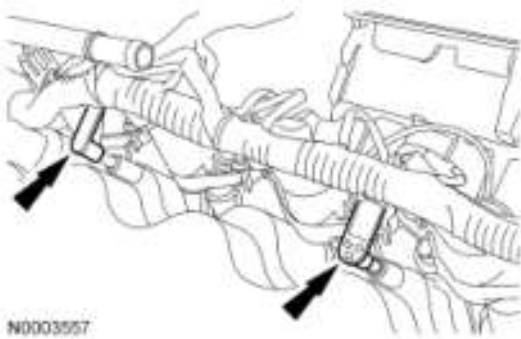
Locating Engine Wiring Harness Retainers At RH Valve Cover
